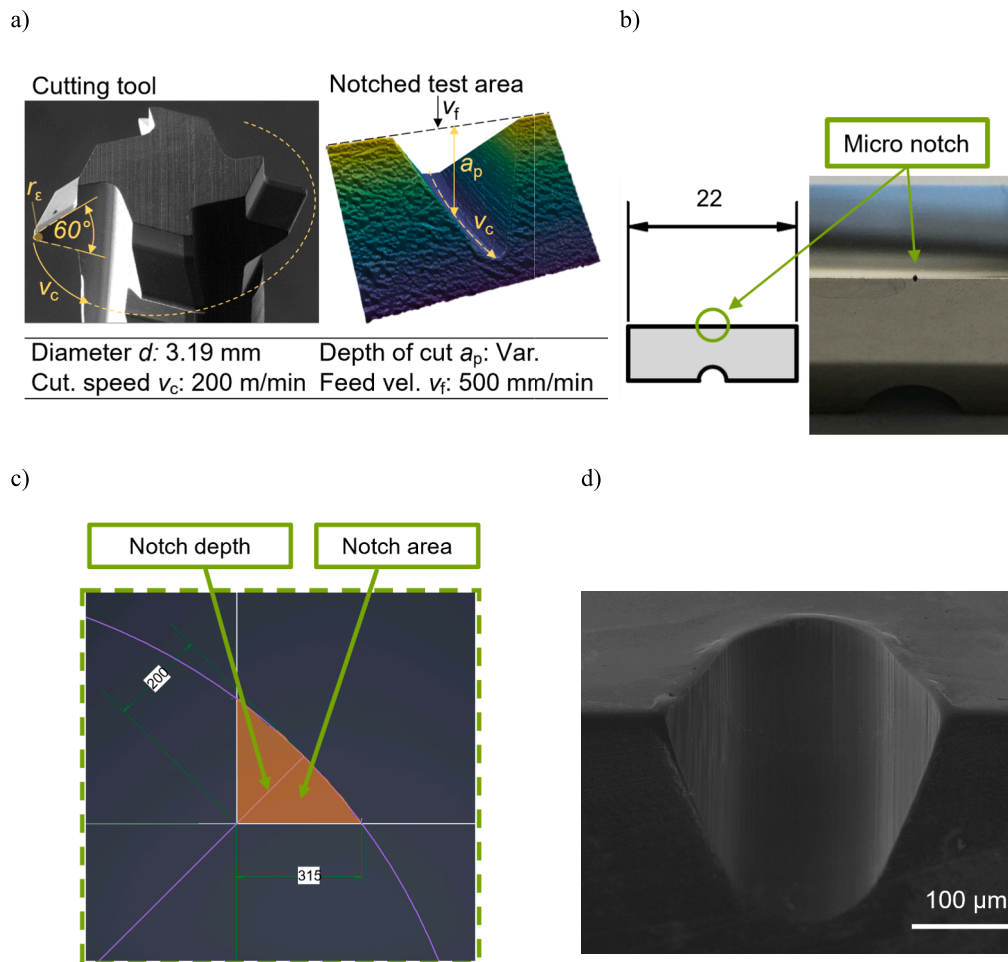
Defect initiation through micro-milling: a) Geometry of milling tool followed by surface determination with a confocal microscope, b) notched mini-bending specimen before testing, c) CAD geometry, and d) real notch after process using SEM.
